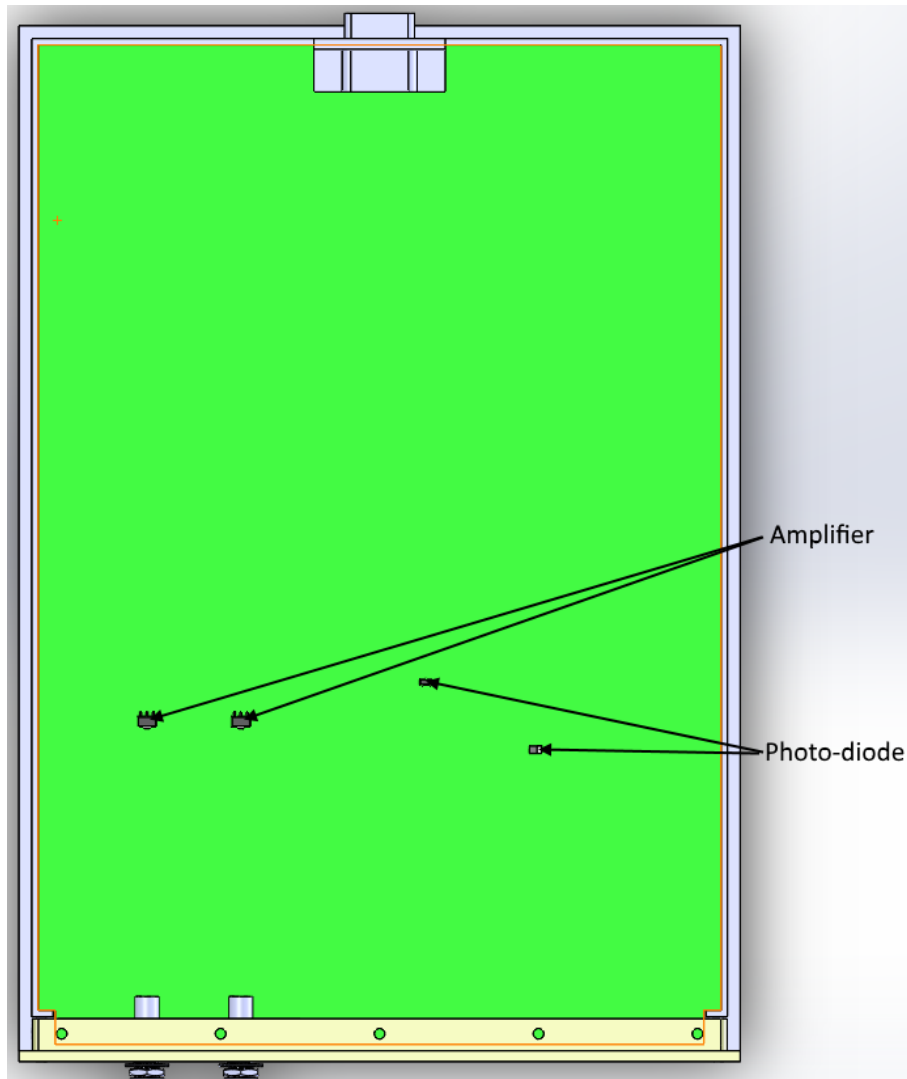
Layout of the Sample Clock Generator PCB design.
